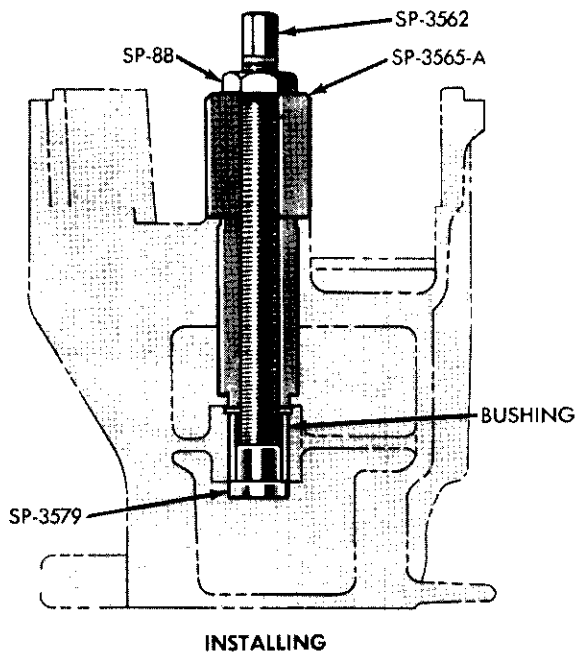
Removing and Installing Pinion Housing Drive Shaft Bushing
